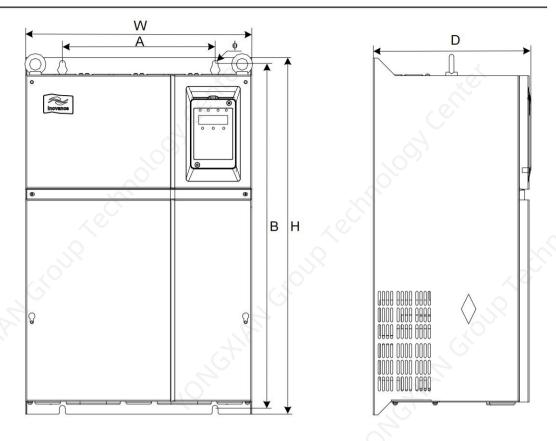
Overview and installation dimensions of the sheet metal structure 37–160 kW
